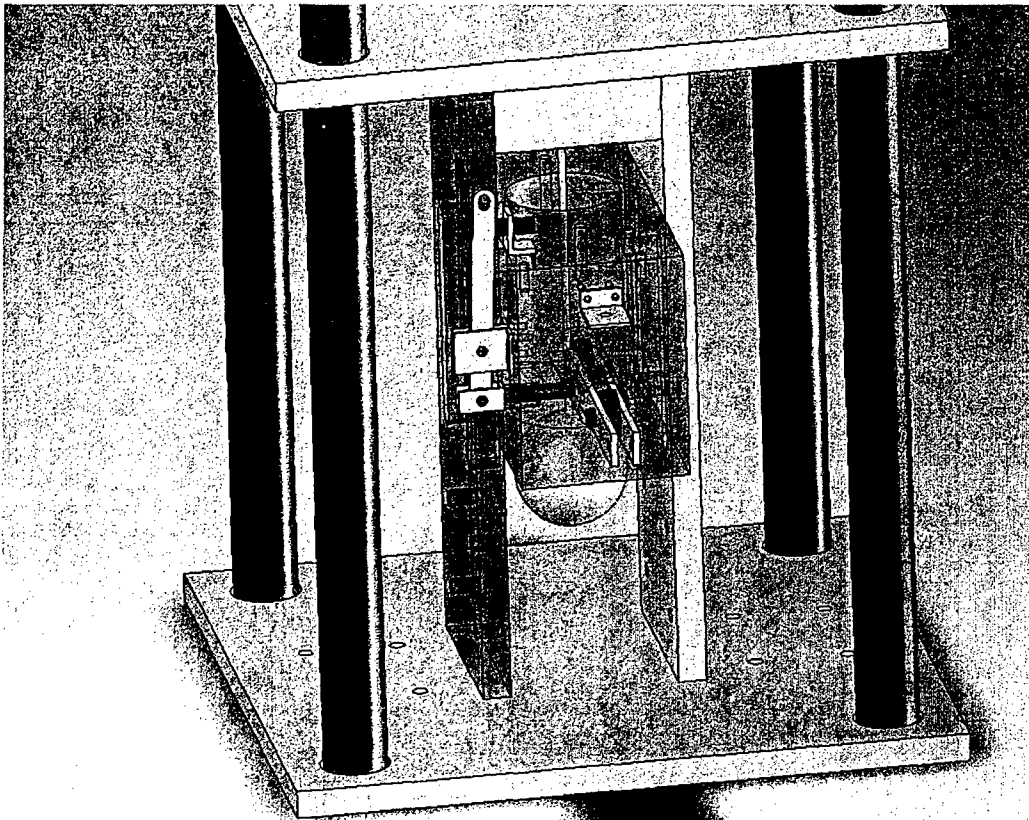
Assembly Drawing of DCB High Rate Experimental Apparatus: Spring Mechanism.
